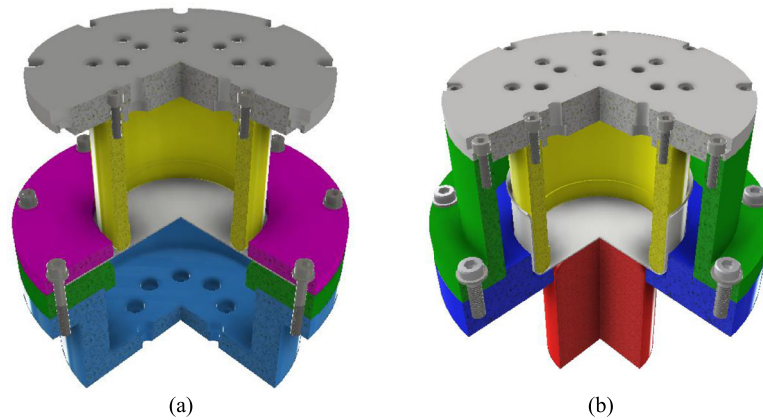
Schemes of the forming tools used in the reverse deep drawing of a cylindrical cup: (a) first stage; (b) second stage.
